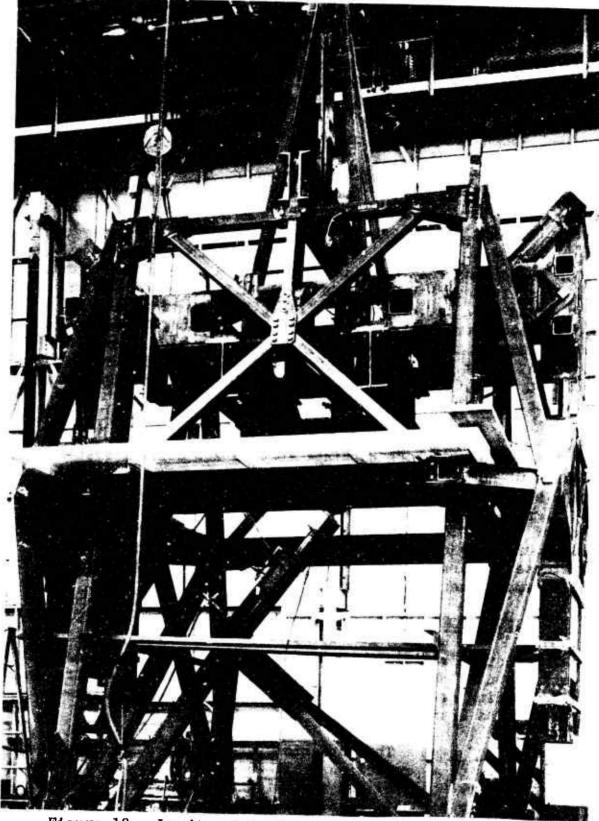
Landing Gear Support Fixture Structural Proof Test for Side Load Condition
